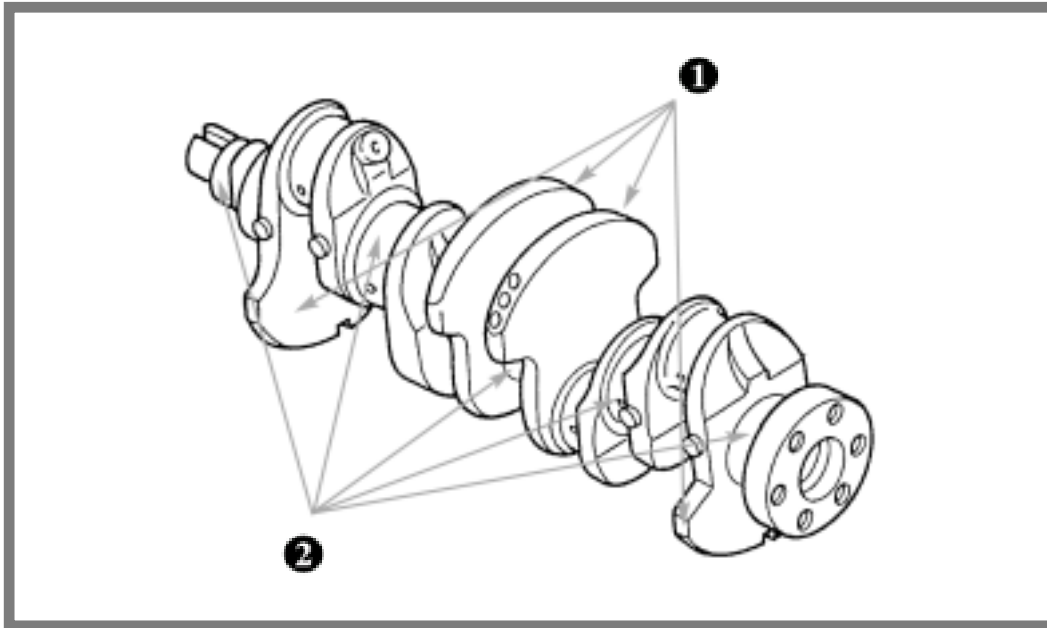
Counterweights on the crankshaft improve balance and prevent vibrations.
